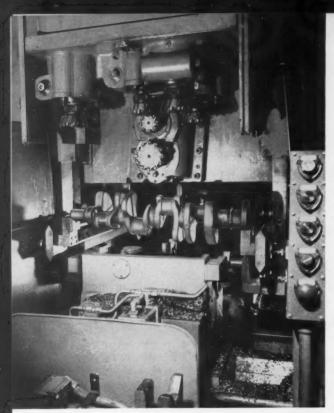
Six locating spots are milled on crankshaft at the second station of this three-station machine. Loading is manual and unloading automatic.
